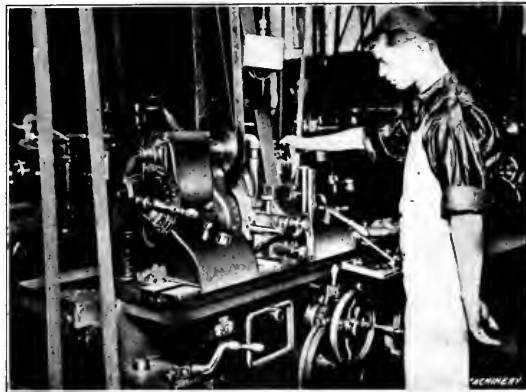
Grinding Poppet Valve Stems in a Landis Plain Grinding Machine
